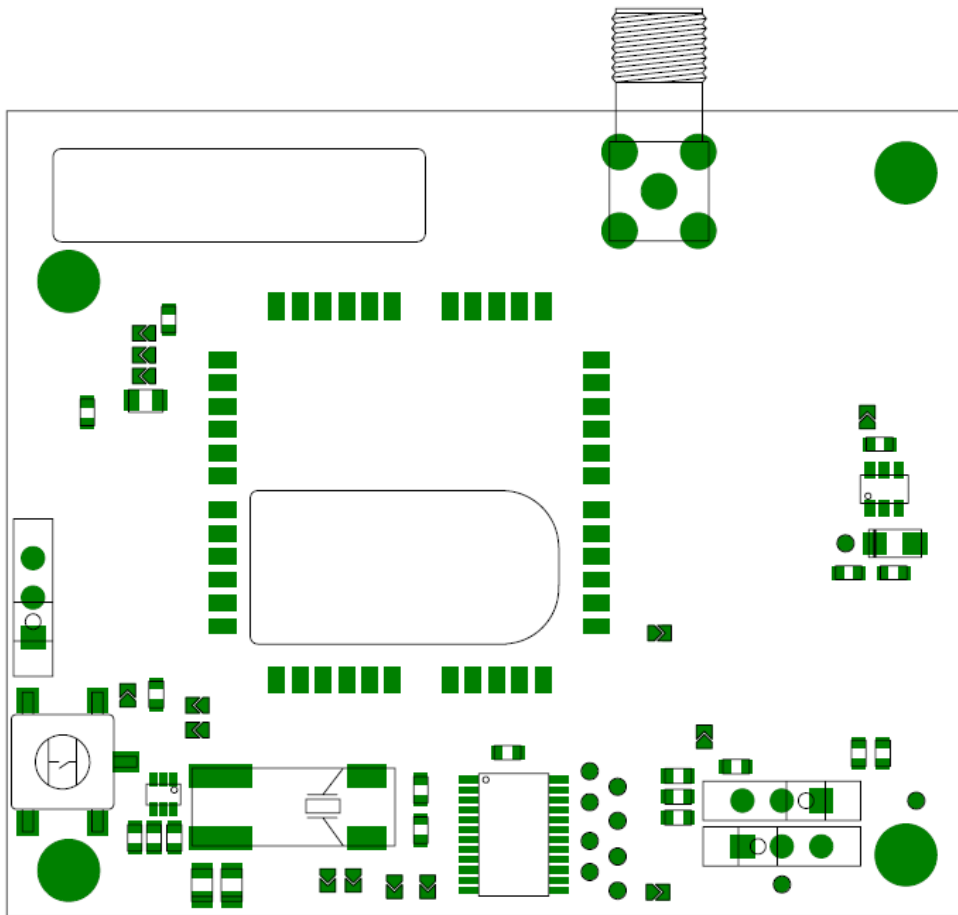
AirPrime WISMO2x8 Socket Board Assembly (Top View)
